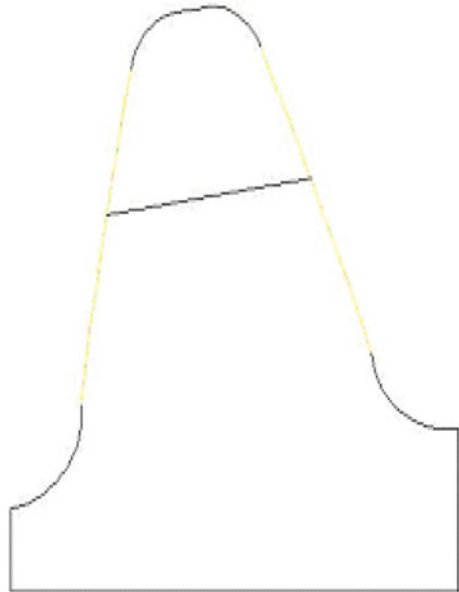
Involute profile of symmetric gear tooth with elliptical² root fillet
